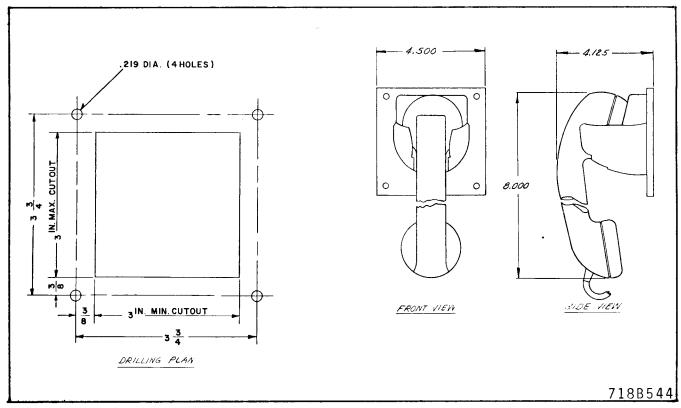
Outline Dimensions for Panel mounted Hookswitch
